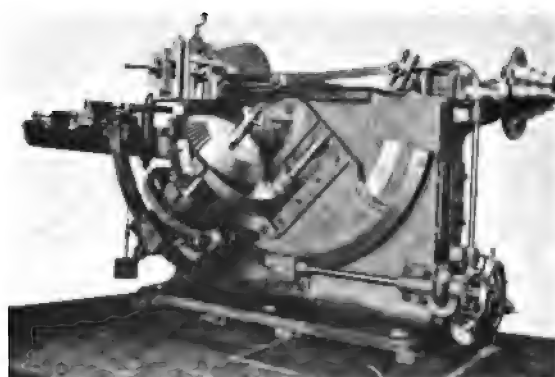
BEVEL GEAR PLANER, WITH ATTACHMENT
